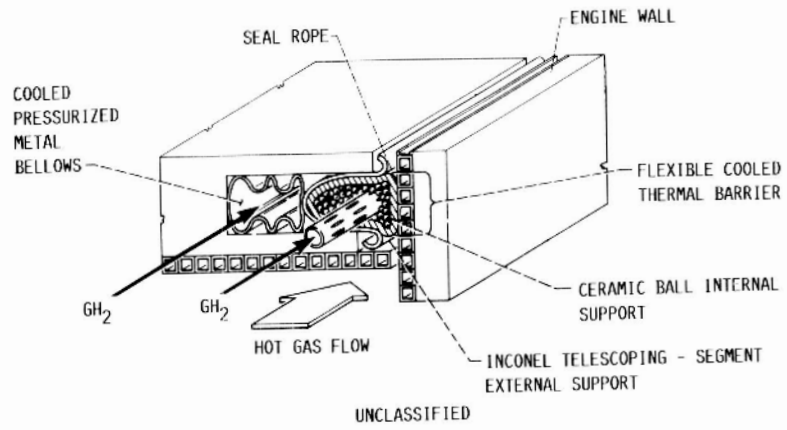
CROSS-SECTION OF ENGINE SEAL.
